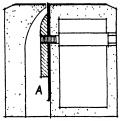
A.—KNIFE STOCK adjusted to meet requirements.
